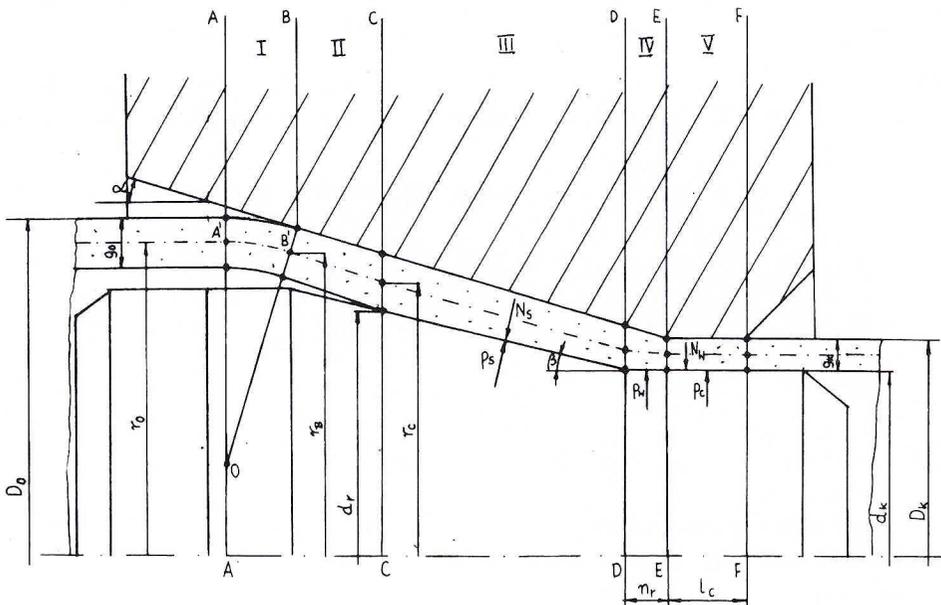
The scheme of tube drawing with deformation zone divided into zones
